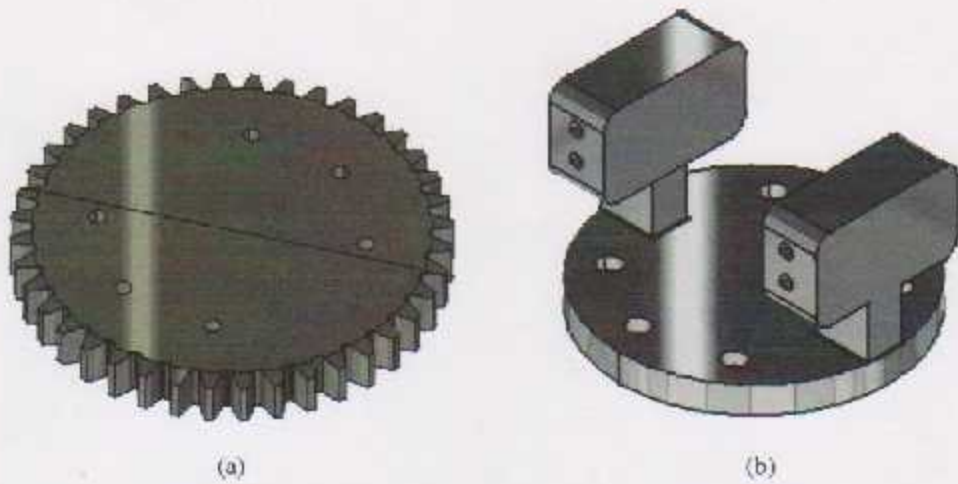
Mechanical parts: (a) spur gear, (b) boom mount part.
